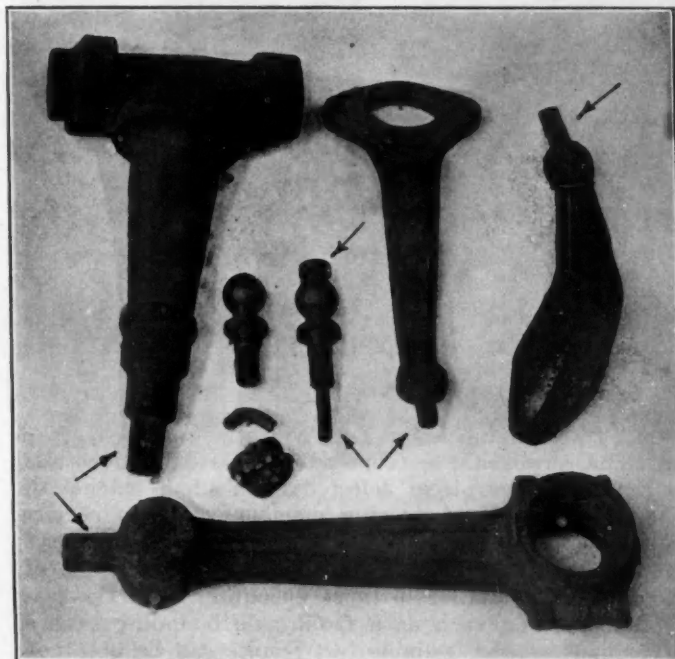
METHOD OF ATTACHING TEST PROLONGATIONS, INDICATED BY ARROWS, TO HIGHLY STRESSED PARTS
